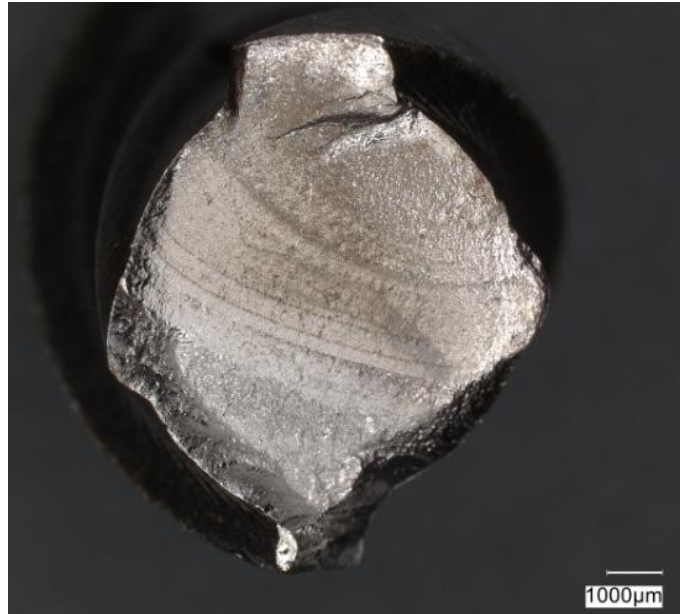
View of the fracture surface at the point of drill bit failure
